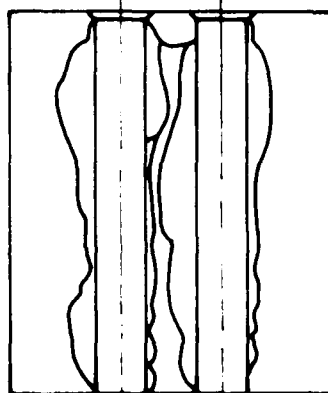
(iii) FRACTURES TYPE (a) SPECIMENS. REAMED 4 mm, OPEN HOLES
